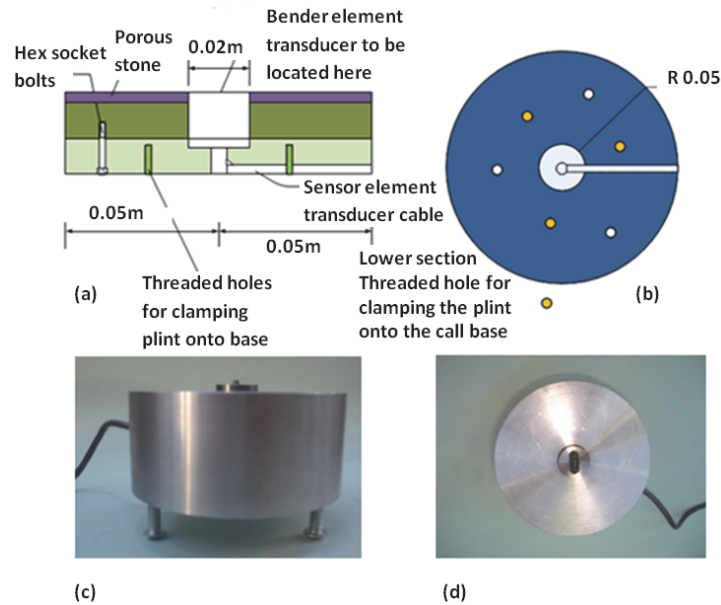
Bottom cap for the bender element test; (a) schematic design seated view, (b) schematic design top view, (c) constructed bottom cap with bender element at the centre front view, (d) constructed bottom cap with bender element at the centre top view
